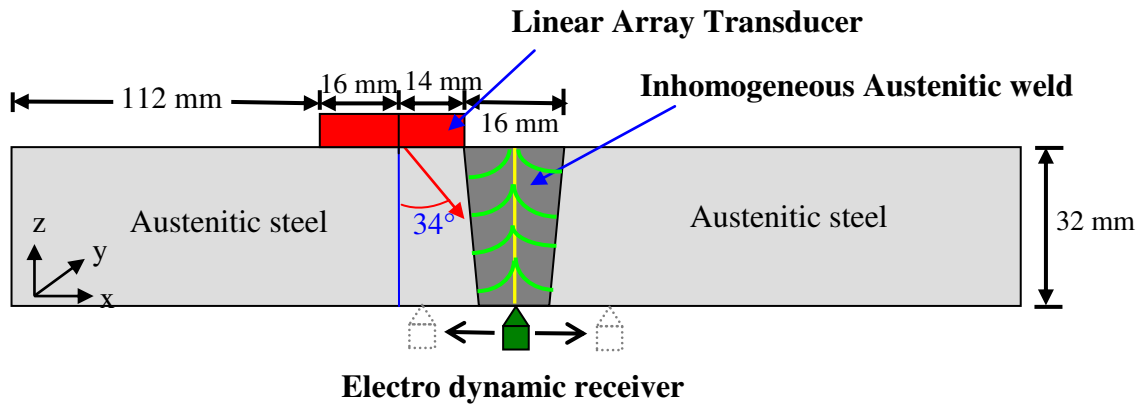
Geometry of the austenitic weld component and location of the transmitter used for the sound field measurements
